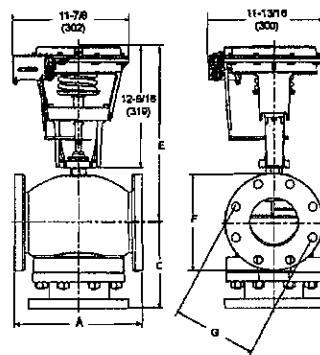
MK-6811 with Flanged 3-Way Globe Valves
